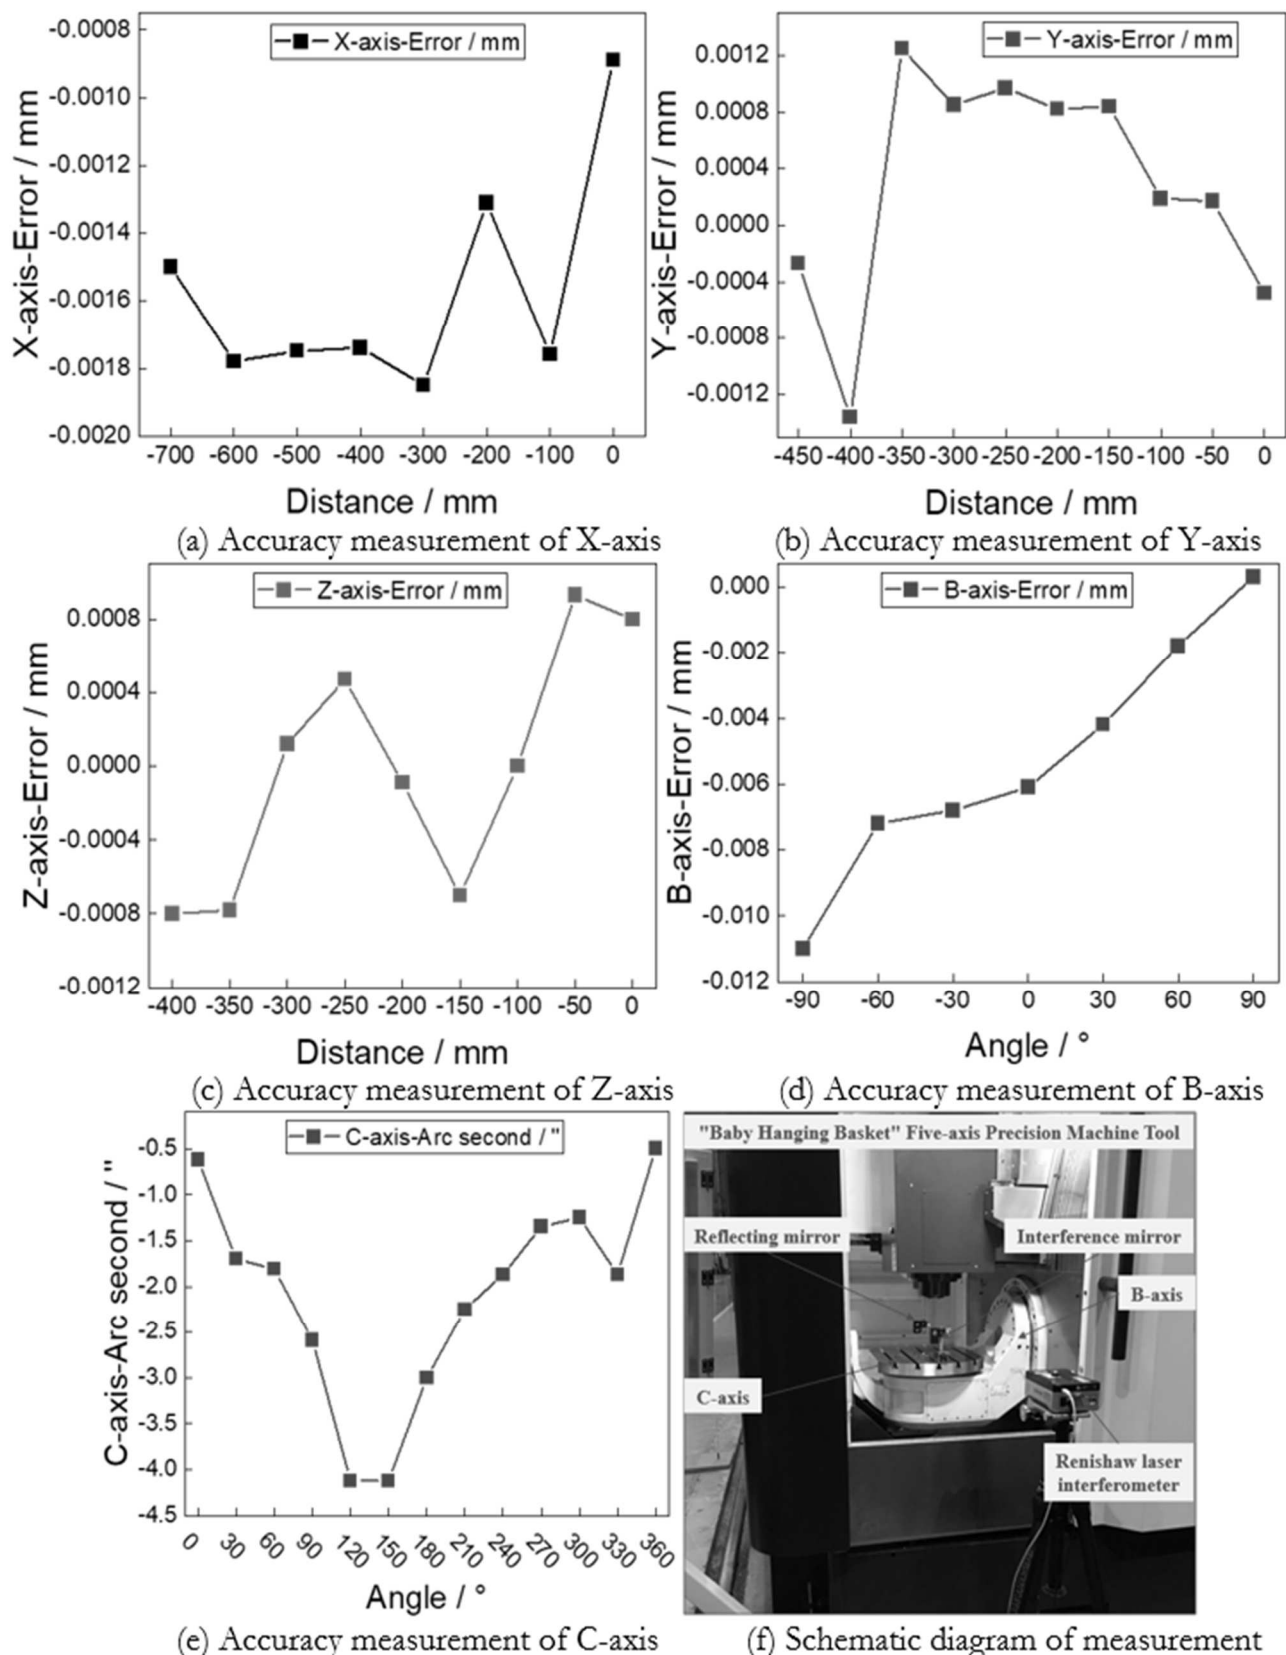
Average measurement results of single-axis precision of "baby hanging basket" five-axis precision machine tool
